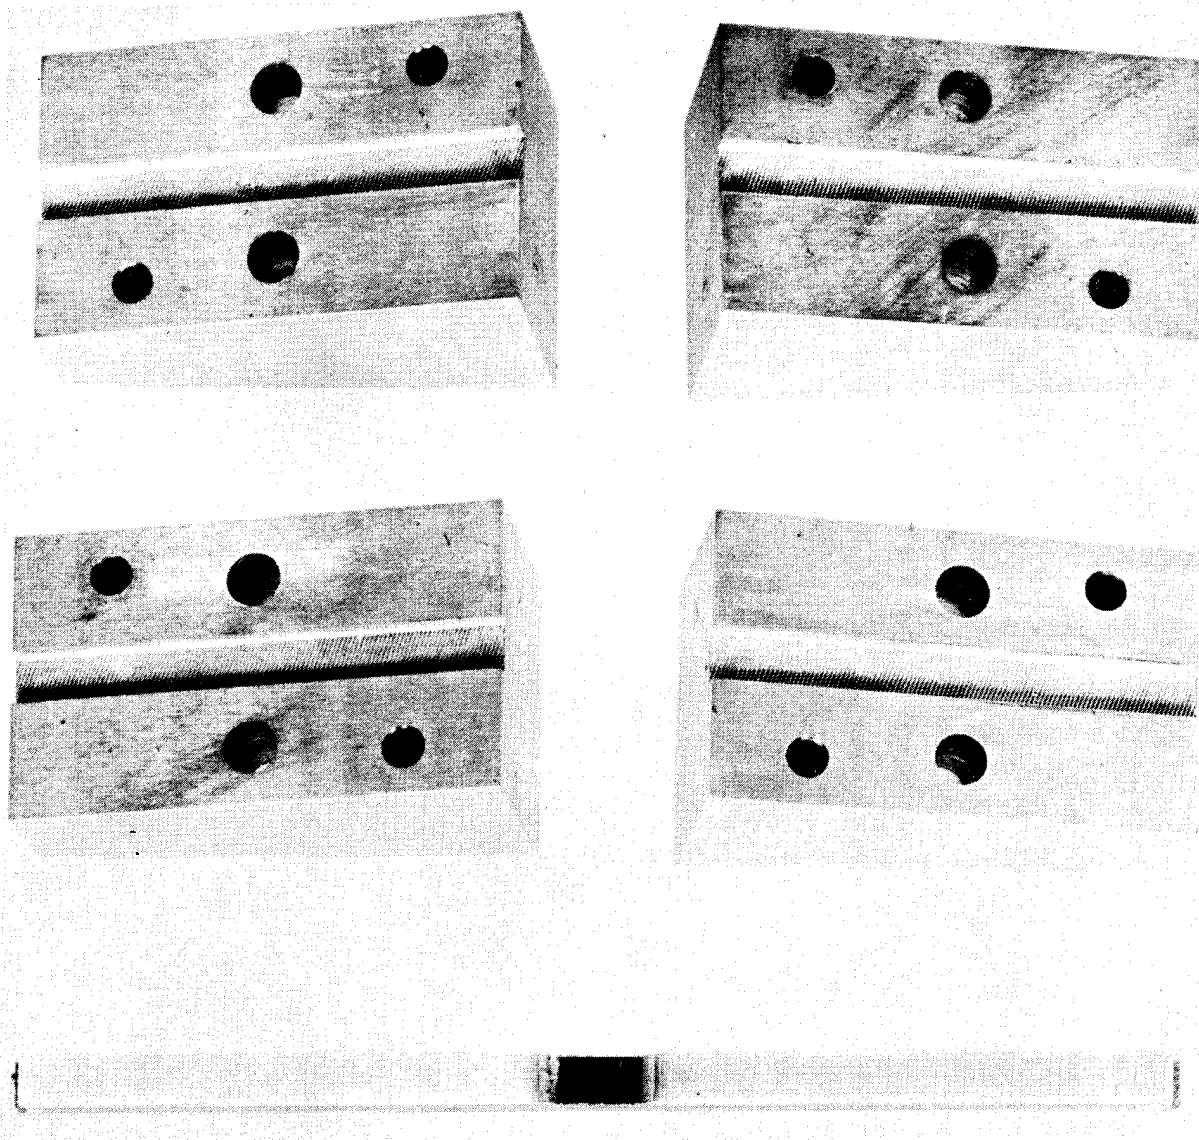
IITRI COMPRESSION COUPON TEST FIXTURE - WEDGE SHAPED SPECIMEN HOLDERS AND TEST SPECIMEN
